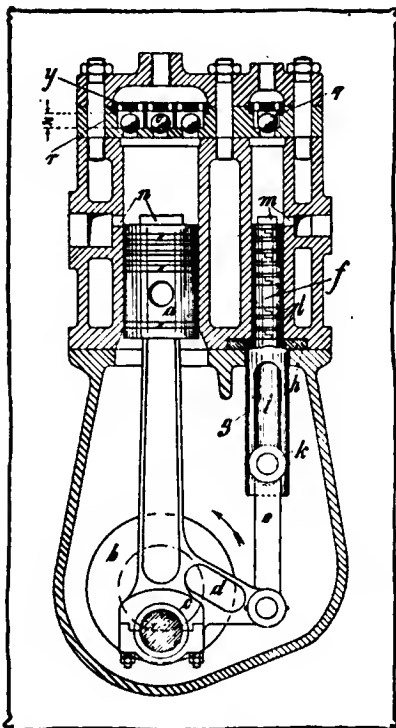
Proposed compound air-compressor for automobile Diesel motors
